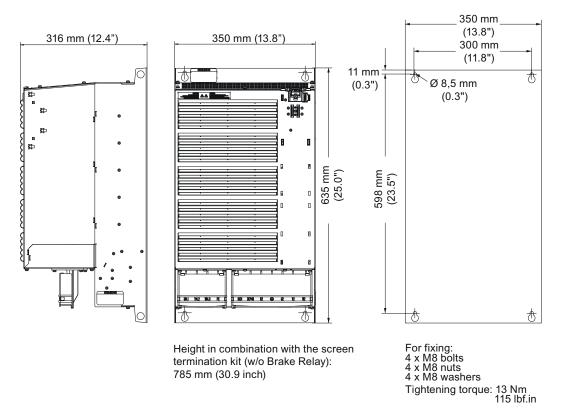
Dimensions and drill pattern for Power Module PM240, FSF, IP20, unfiltered
